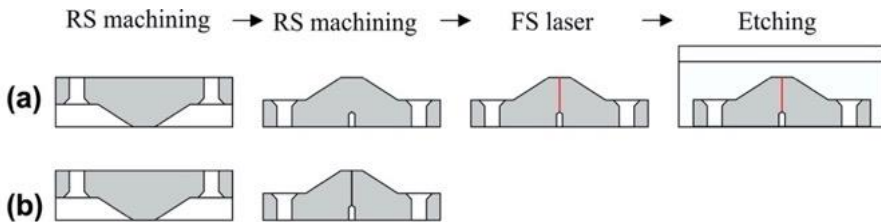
The flowchart of nozzle fabrication by hybrid laser machining technique (a), and nanosecond rear-side machining (b). In the processing steps, the laser beam propagates from top to bottom [156].
